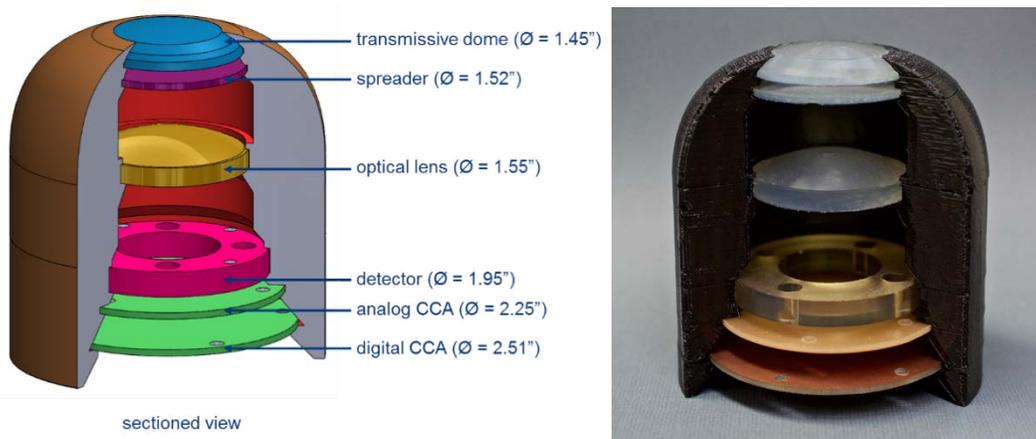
Left) Drawing of missile seeker, and right) completed part.
